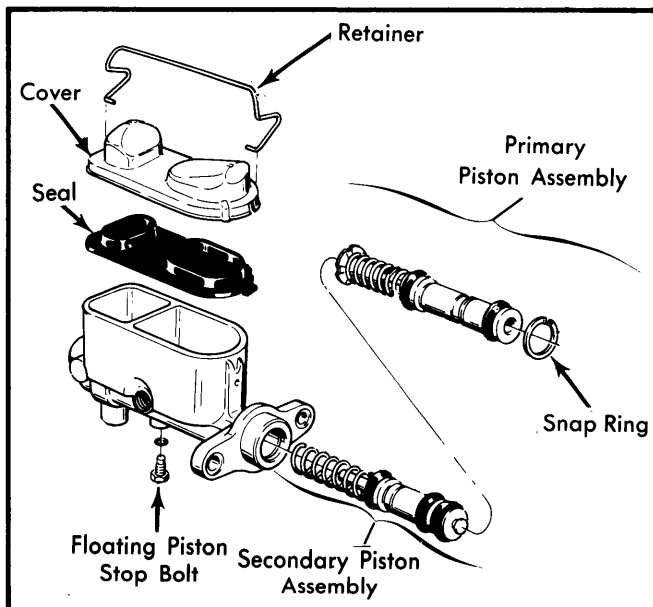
Typical Bendix Master Cylinder (Ford Motor Co. Shown)
